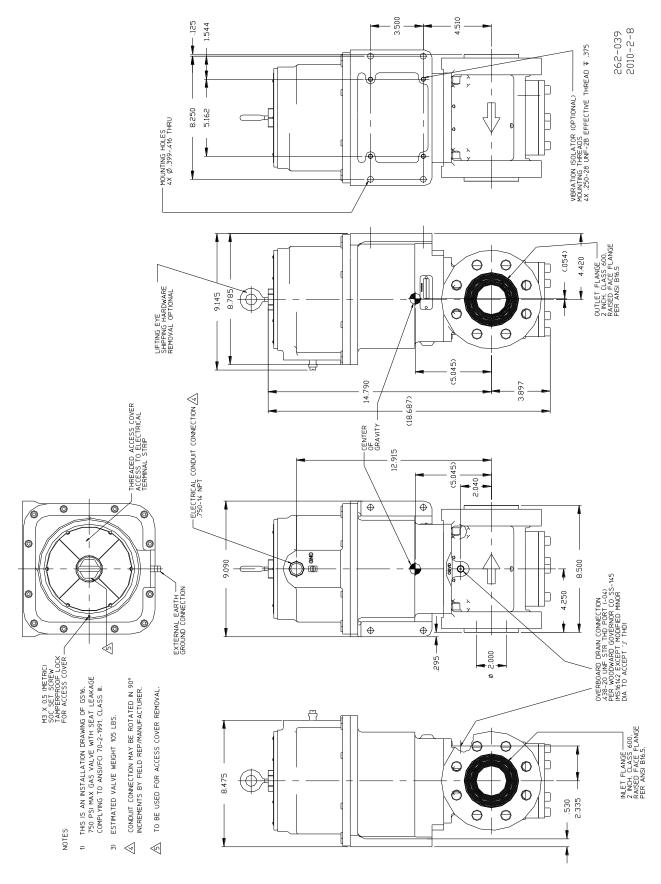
GS16 Valve Outline Drawing (Standard Valve; Single Conduit) (dimensions shown are in inches)
